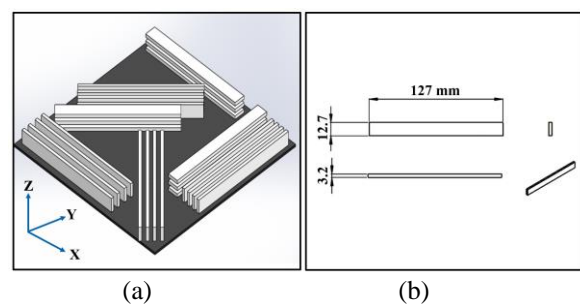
The printed ABS specimens and building orientations: (a) an illustration of a typical printing tray design showing the main axes; (b) a drawing of the tested three-point bending test specimen
